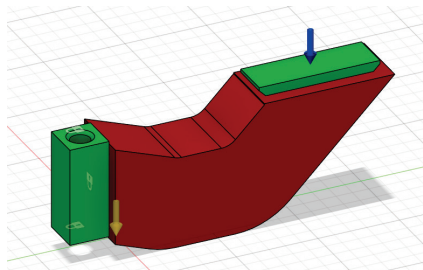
View of the solids defining the preserved geometry and the obstacle geometry
